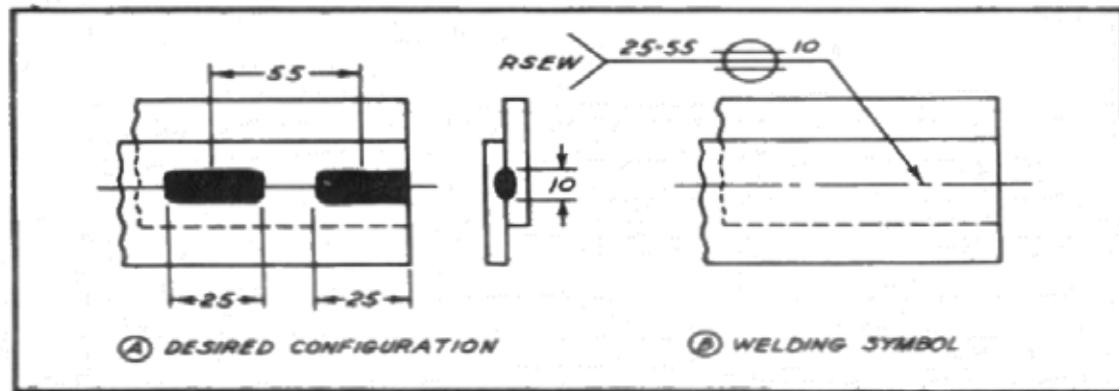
Expressing an intermittent weld. Units are in millimeters.
